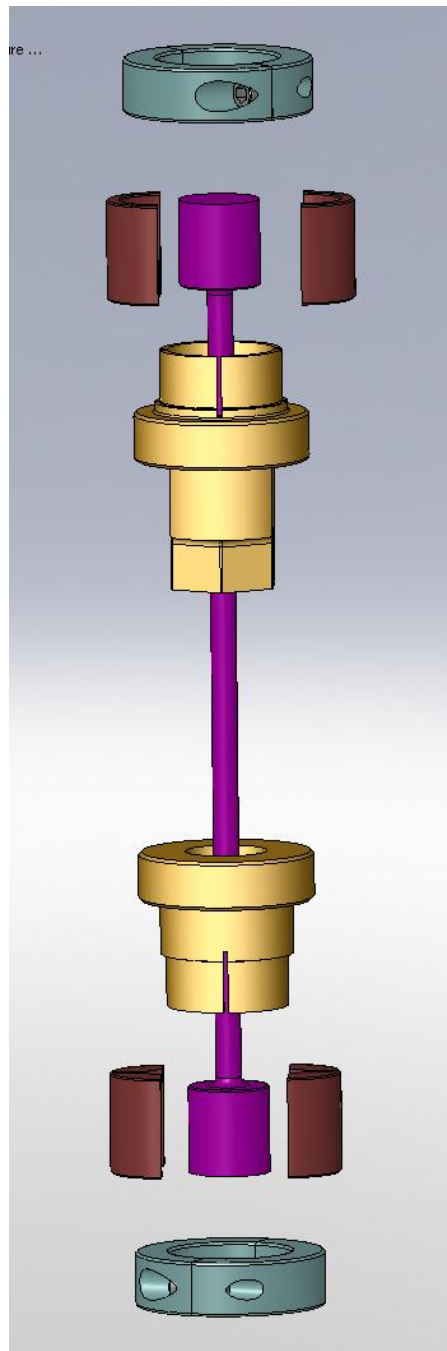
Exploded view of D0902103 Stage 0-1 Flexure Rod Assembly
